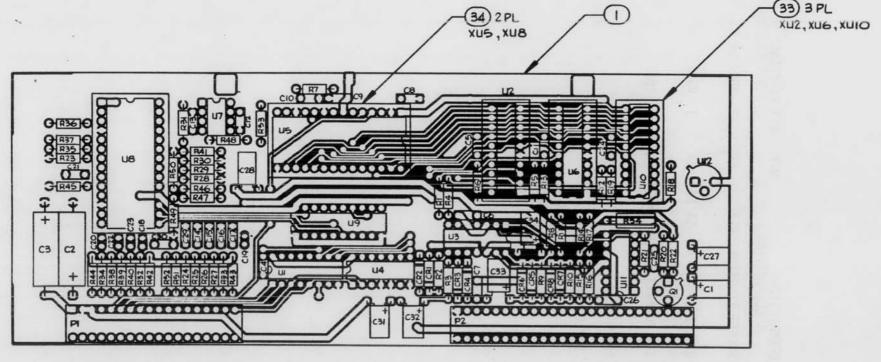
Microprocessor A5 Parts List, Part No. 659589 (Sheet 3 of 4)
